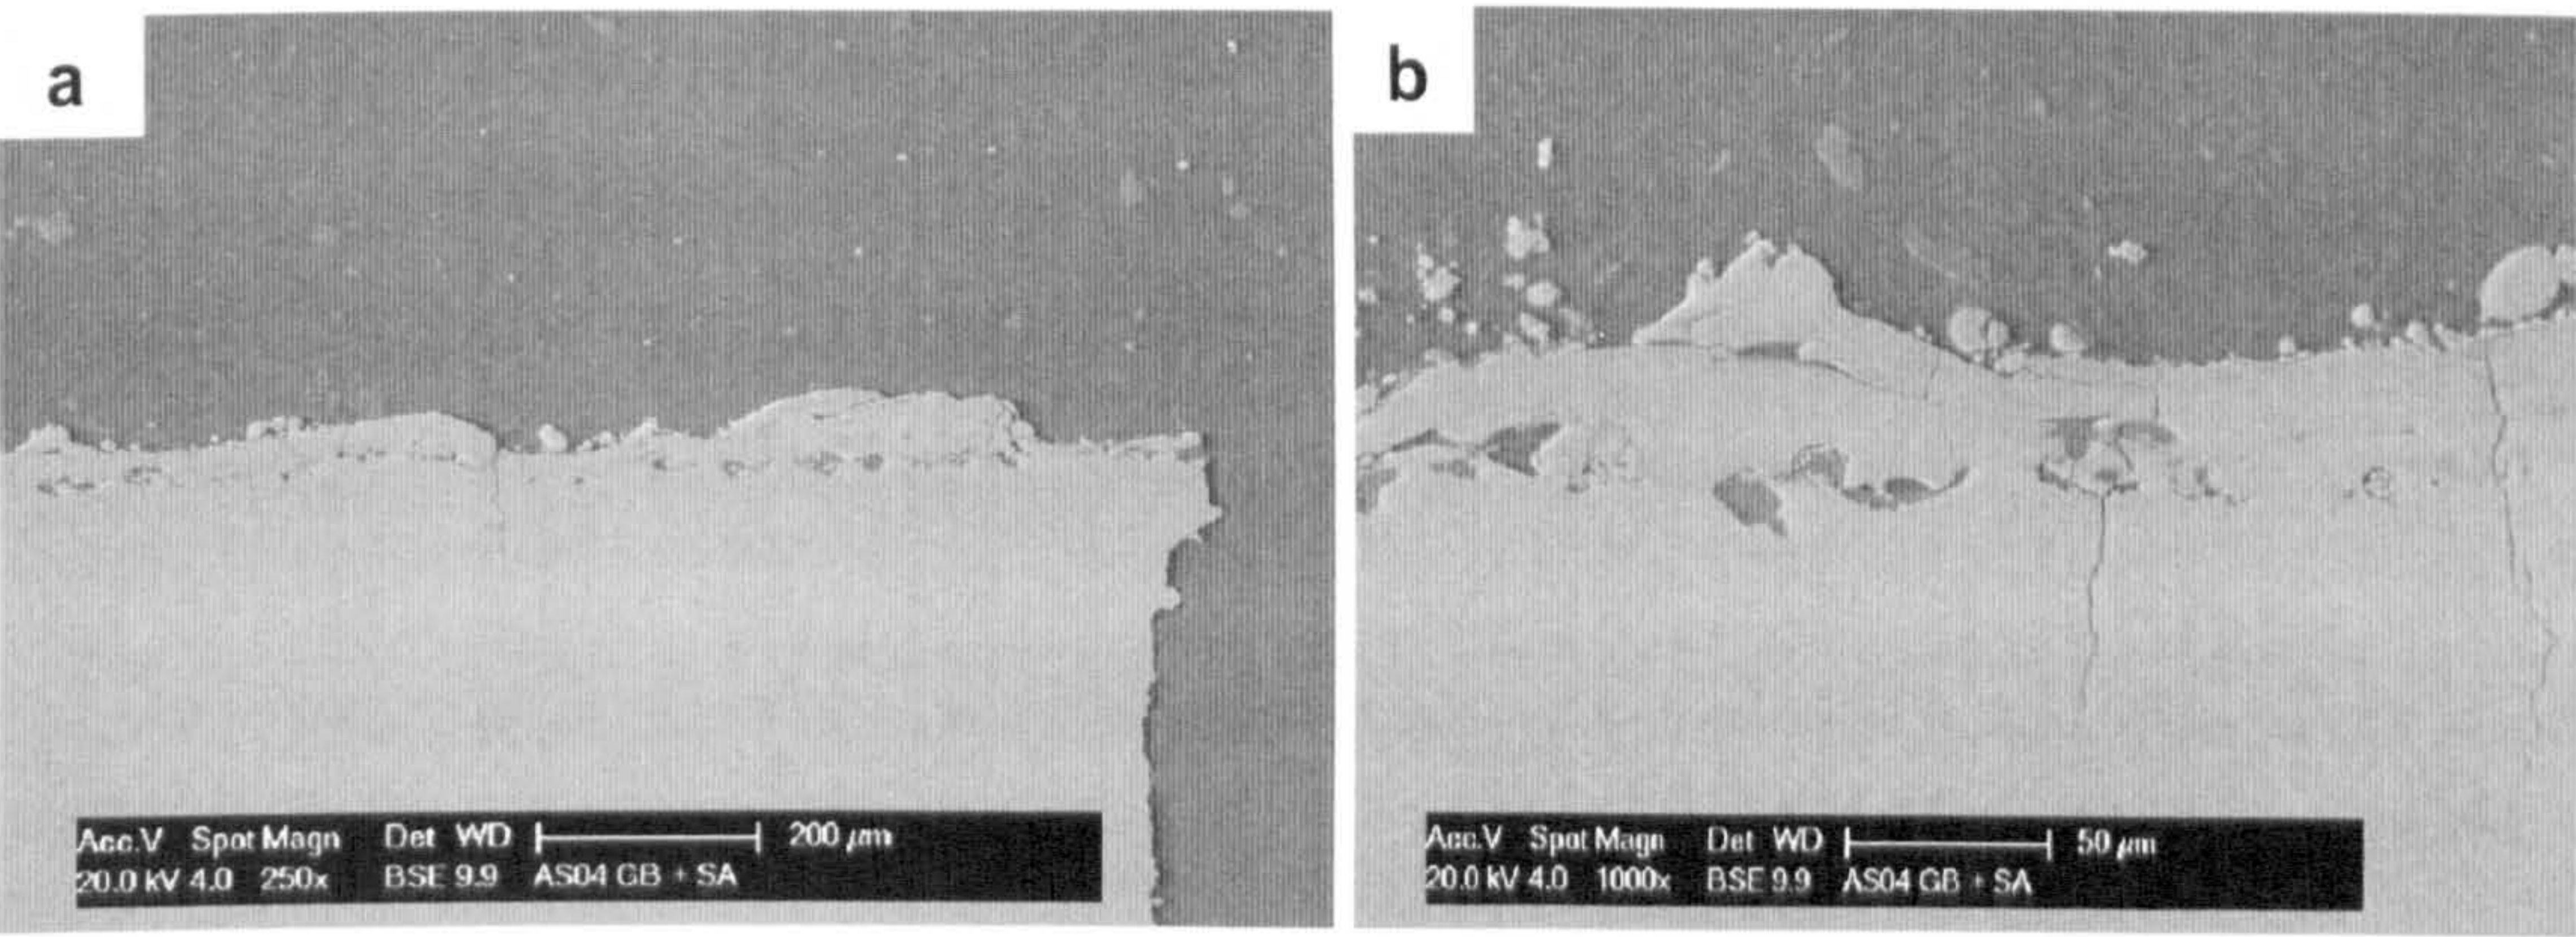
BSE images of the cross section of the Ti6Al4V substrate with a grit blasted surface finish and the shrouded arc titanium coating close to the fatigue fracture at (a) low magnification and (b) high magnification. Cracking that runs from the coating into the substrate can be identified.
